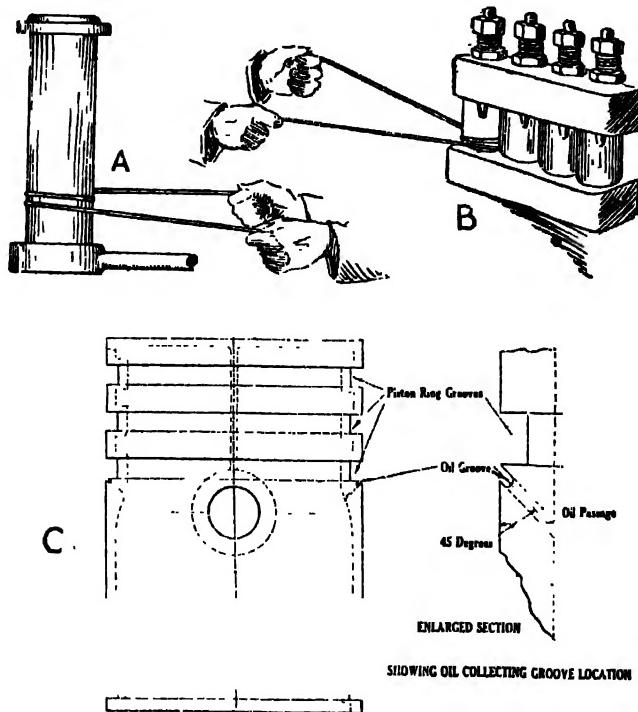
Showing Simple Method of Cleaning Sight Feed Manifold Glasses at A and B. One Method of Curing Smoky Motor shown at C.
